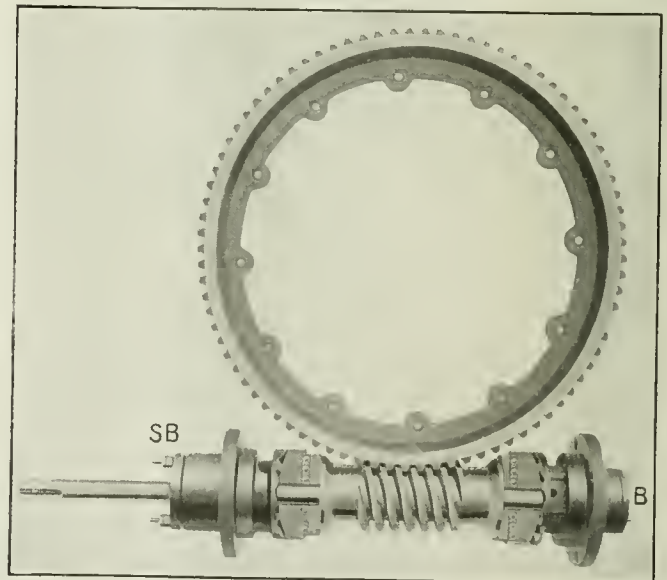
SINGLE WORM AND GEAR, SHOWING BALL-THRUST BEARINGS
